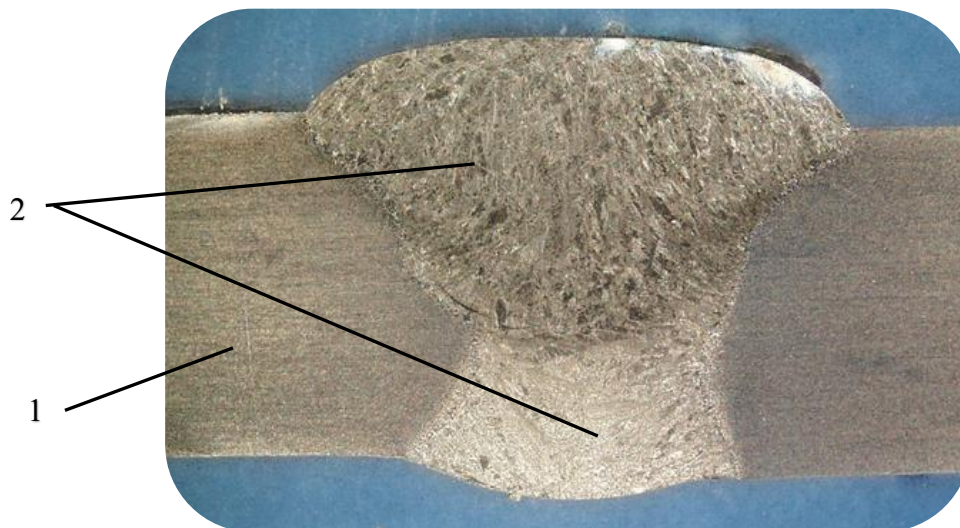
Image of the macrostructure of a two-pass weld: 1 - base metal; 2 – weld metal.
